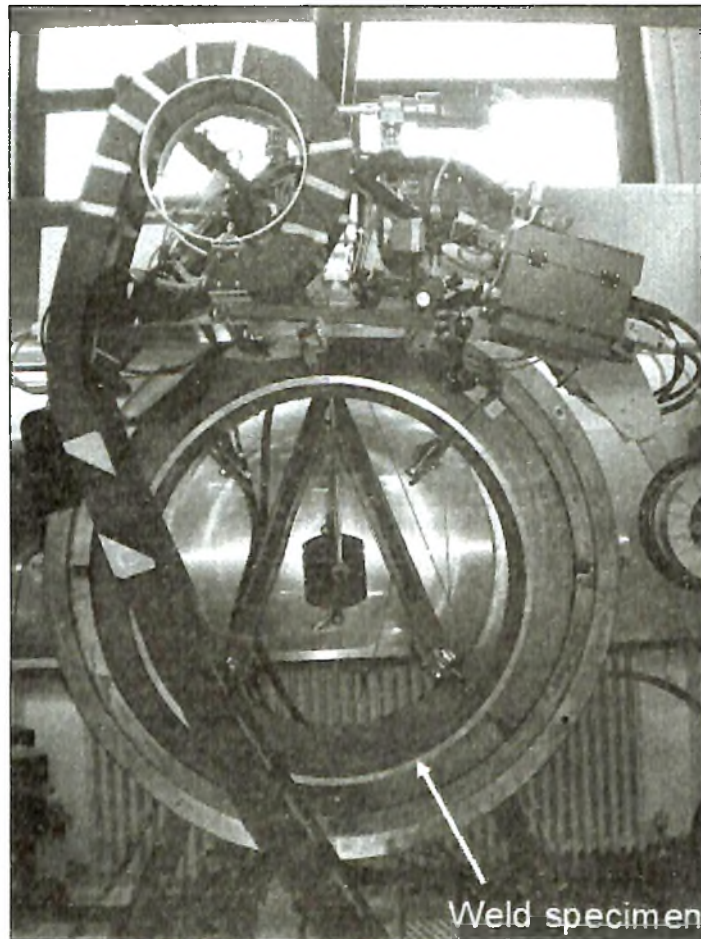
Orbital welding equipment with laser arc hybrid weld head for large diameter pipes at BAM
